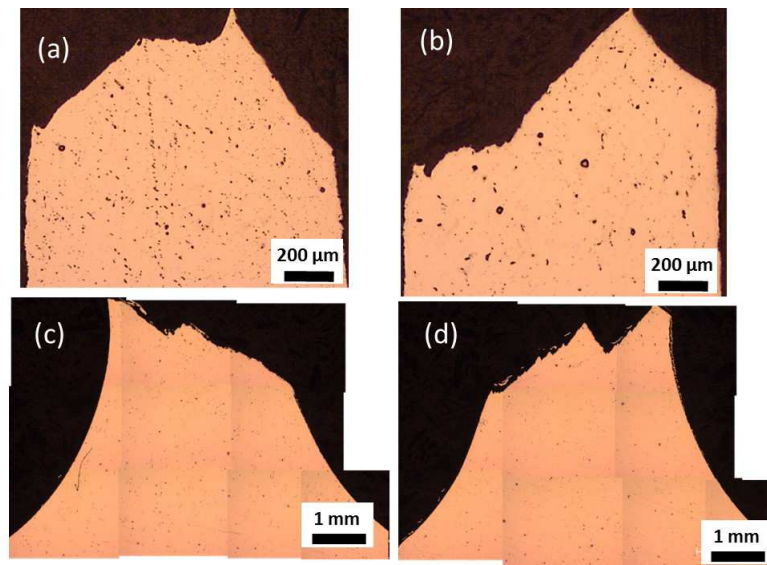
Profile of the fractures specimens showing macroscopic failure mode. The polished section under the fracture surface when viewed under optical microscope shows the failure profile for (a) 4A uniaxial (b) 4C uniaxial (c) 4A RN10 bar (d) 4C RN10 bar.
